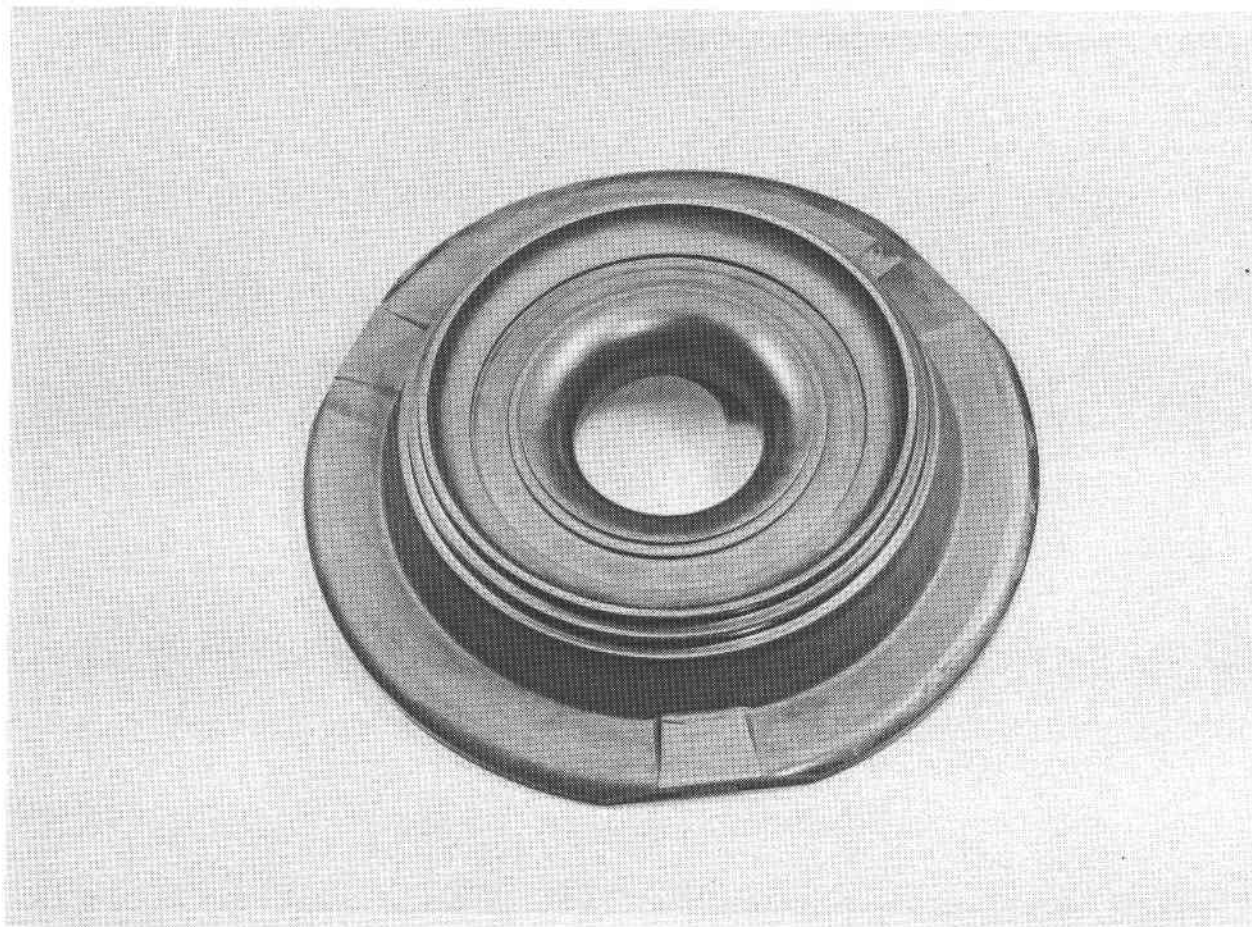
Sintered Turbine Shroud with 3-Slot Flange Design
